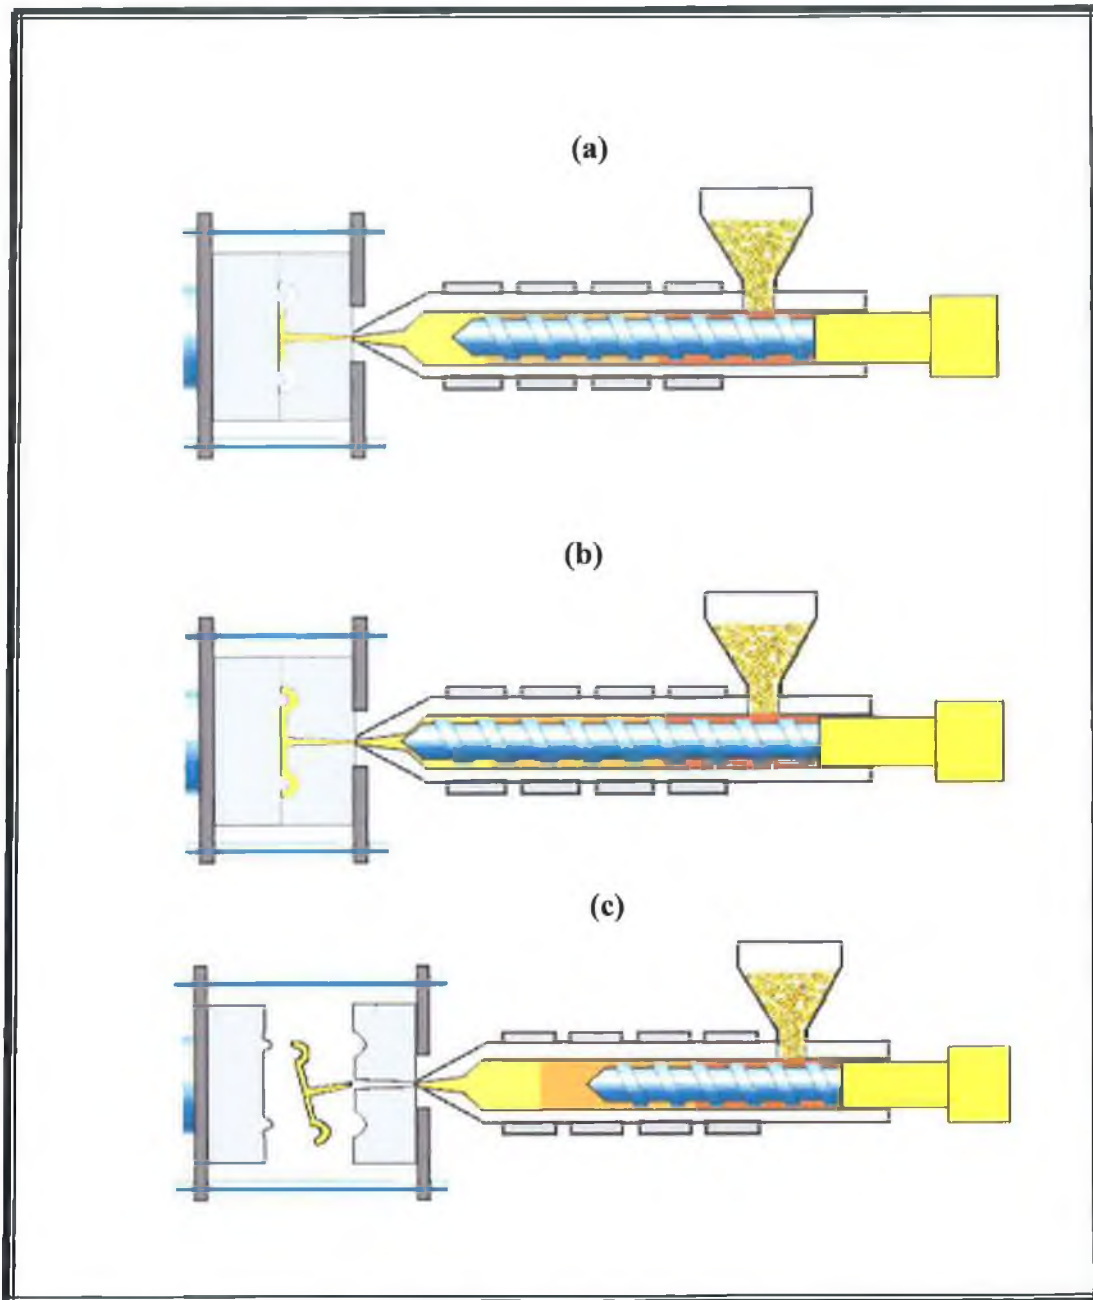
Main stage in the injection moulding process (a) filling (b) packing and cooling (c) [46].
